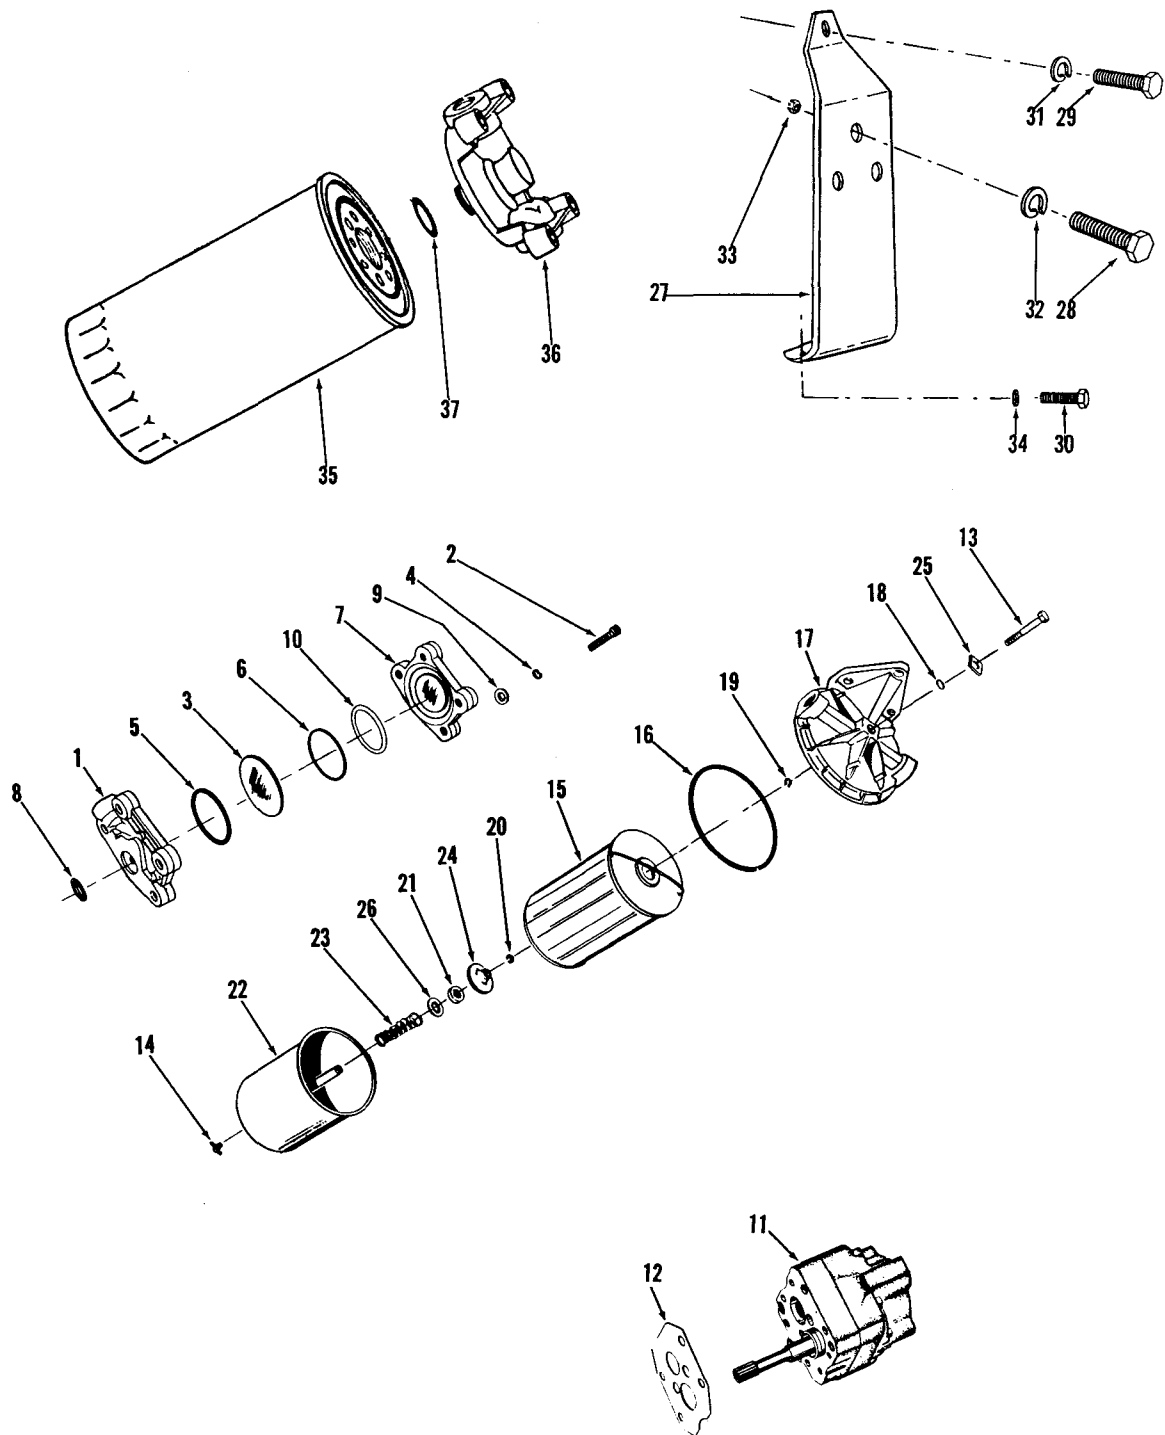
FUEL PUMP DAMPER, GEAR PUMP and FILTERS
